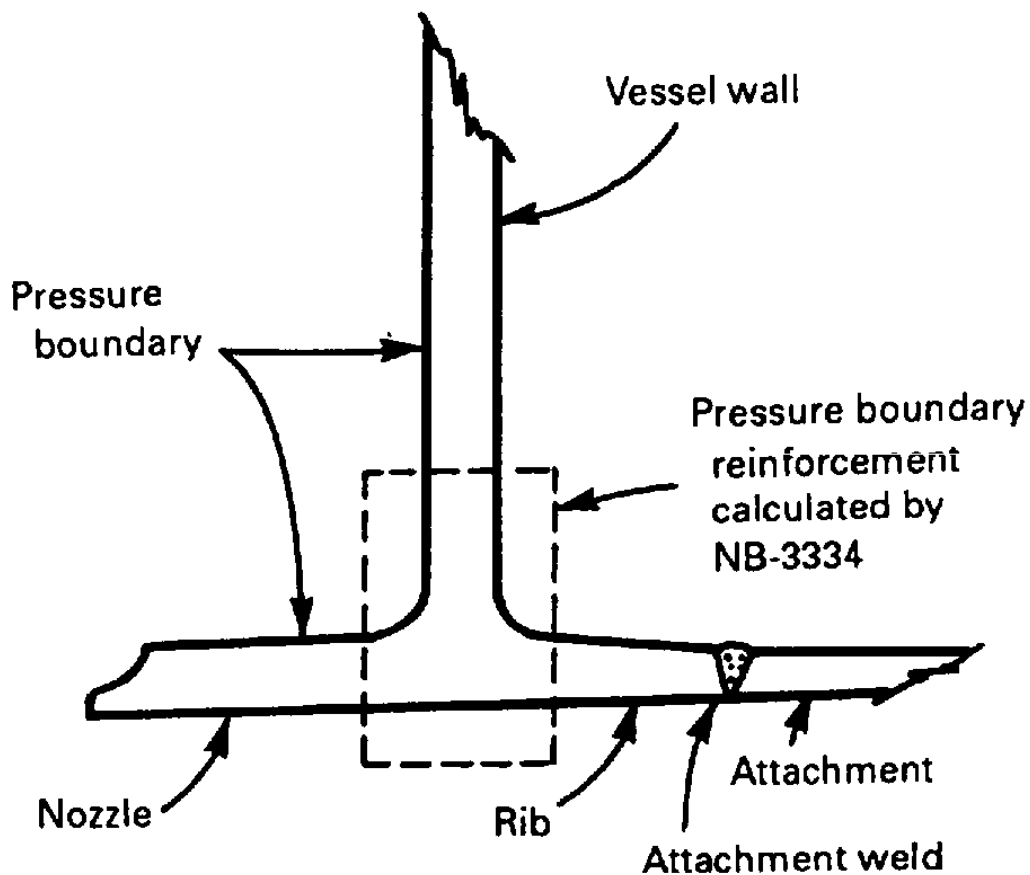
PERMISSIBLE ATTACHMENT WELD LOCATION
